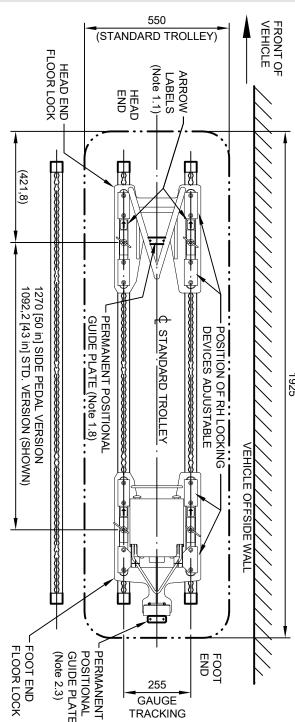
Two-part floor lock installed in standard position securing standard trolley
